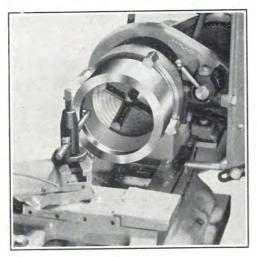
Boring the inside of a large steel bushing. Note high-speed boring tool mounted directly in tool post for maximum rigidity.
